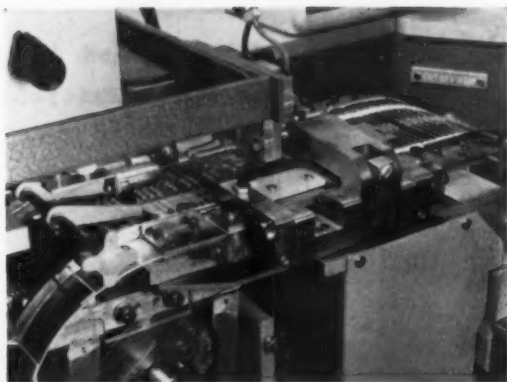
TEST PROBES in the form of contact springs make contact with each component as it passes the test assembly. Cutoff knife on heavy hinged cross-bar severs leads on any component found "out of tolerance" when it arrives in cutoff position.
